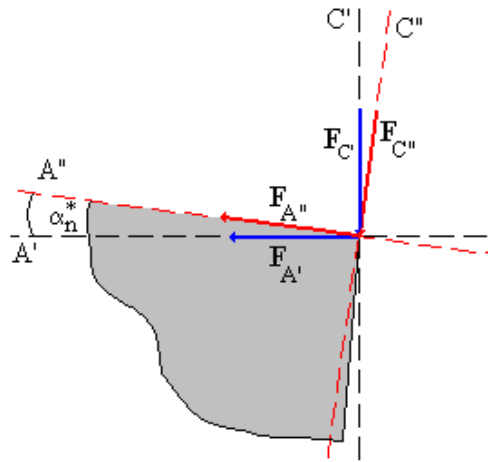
Planar view of cutting tool when projected in the modified radial direction
